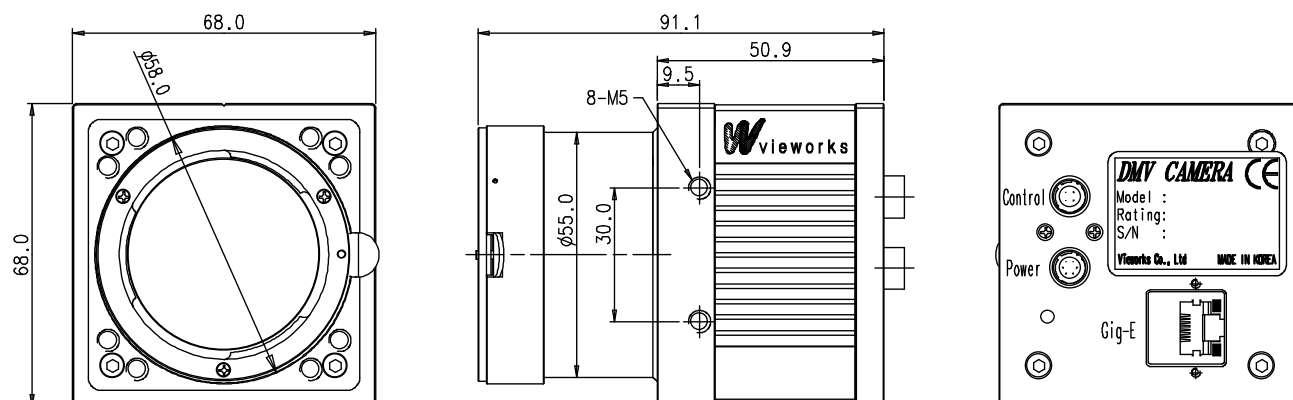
VH-5MG Mechanical Dimension (F-Mount)
